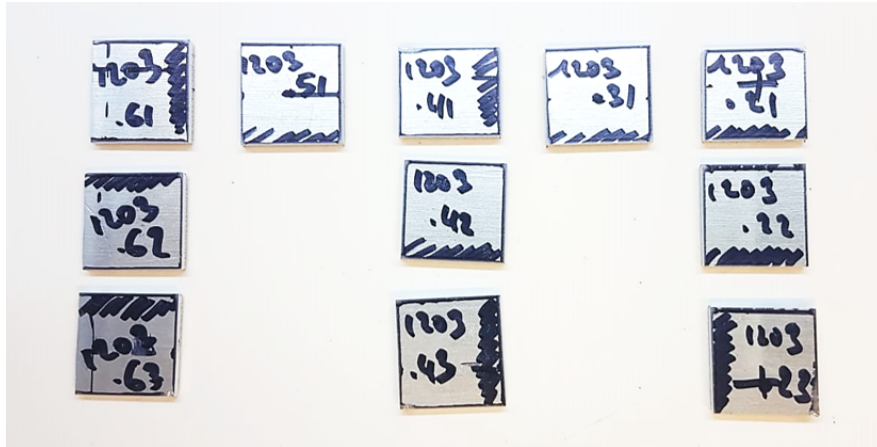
Sample pieces of a full-size plate produced by laser cutting.
